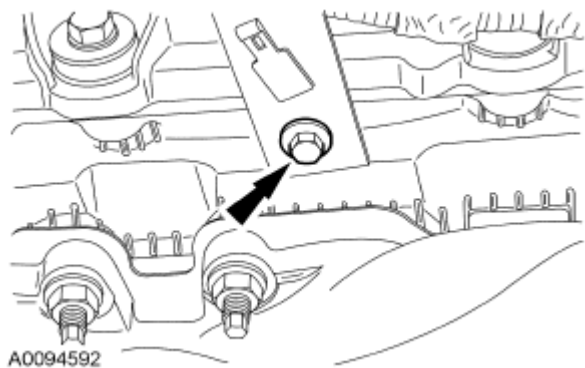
Locating Power Steering Tube Bracket Bolt (1 Of 2)
